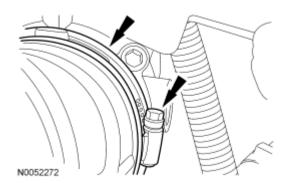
Locating LH CMP Sensor Electrical Connector Courtesy of FORD MOTOR CO.
